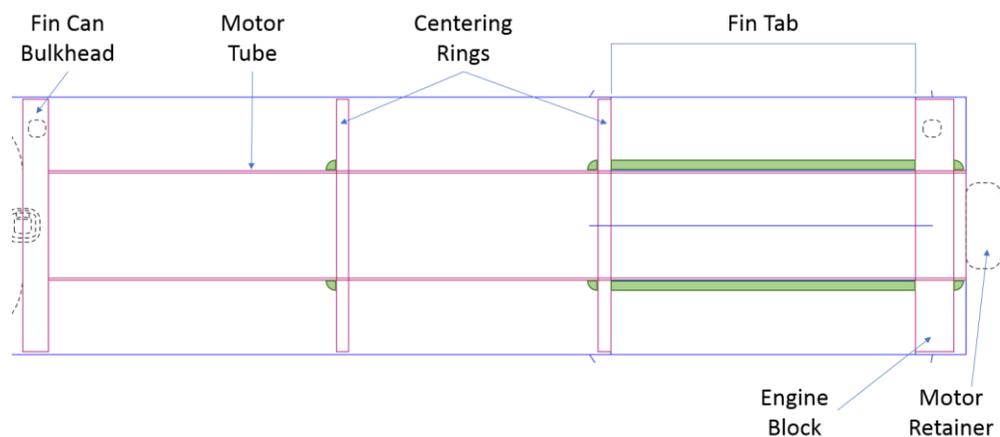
Motor Tube with Epoxy Areas Highlighted
